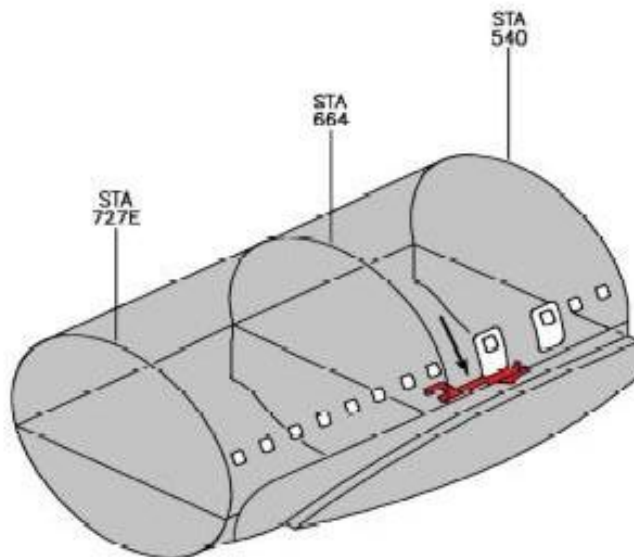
INSPECTION: TRIM AIR CHECK VALVES
